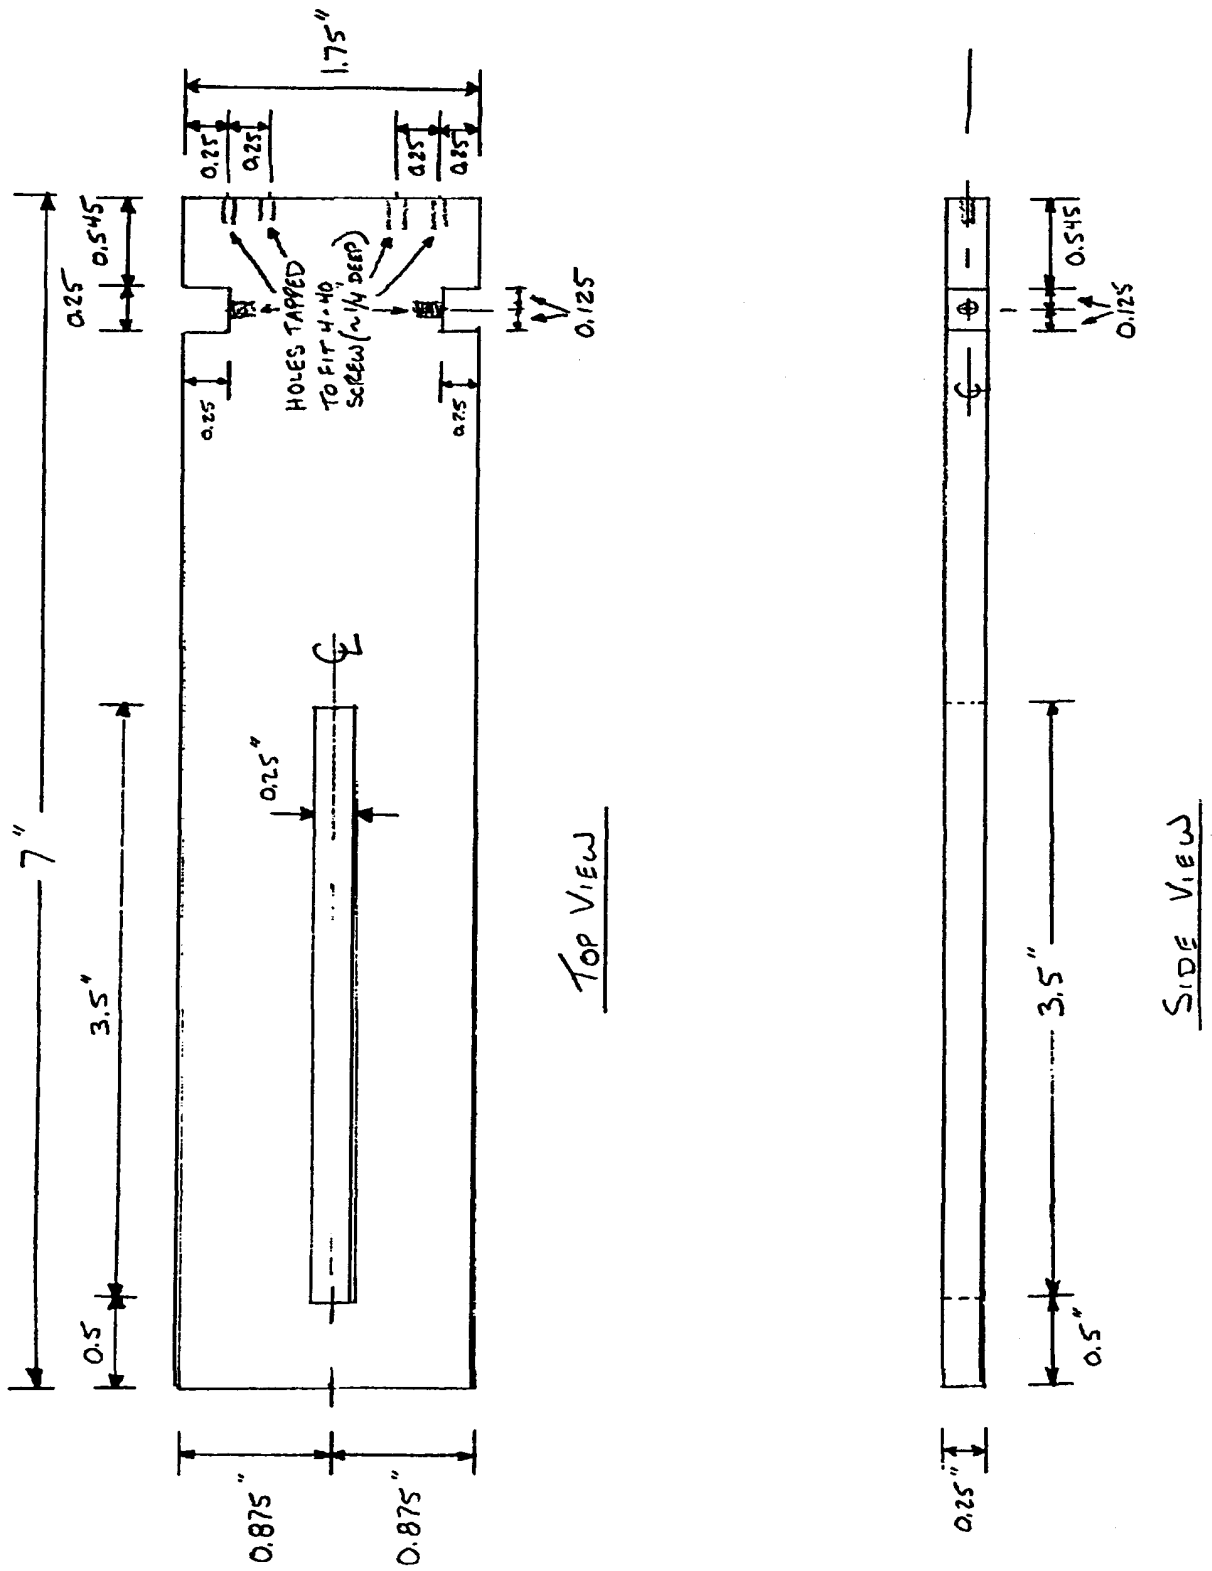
Mechanical drawing. Horizontal support attaching the proximity sensor mount to the rotation stage.
